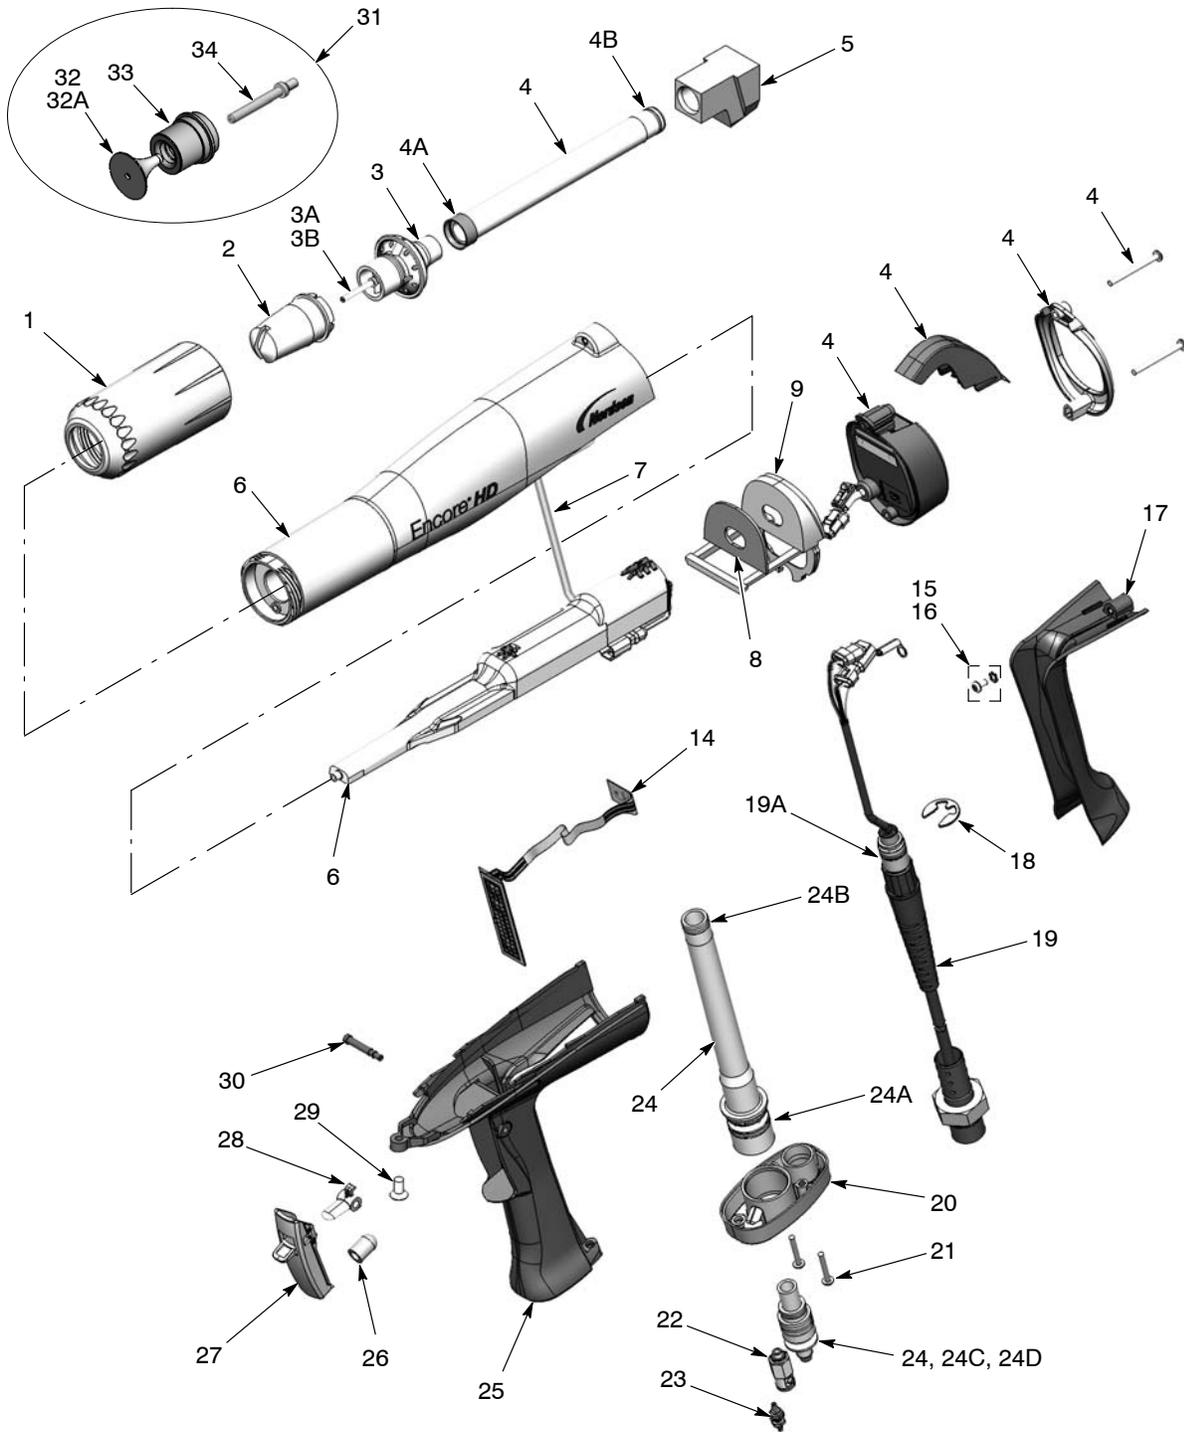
Encore HD Manual Spray Gun and Accessories Parts
